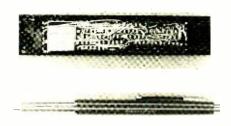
INSIDE VIEW of a probe-type digital frequency meter. Compact construction is due to the "bricklaying" technique.
